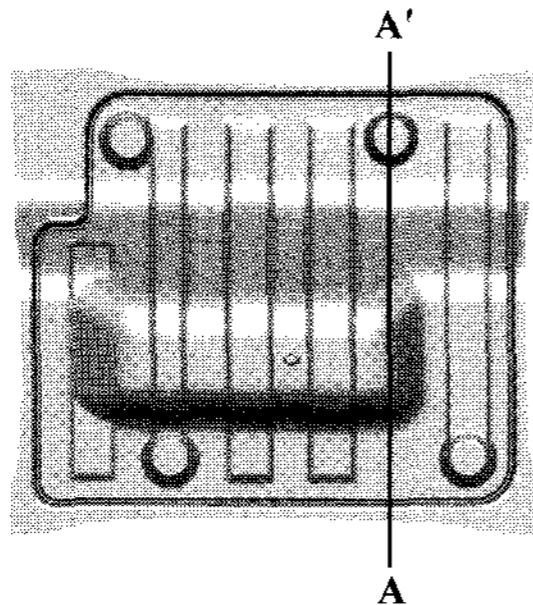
Final formed shape in the drawing process of the original heat protector panel
